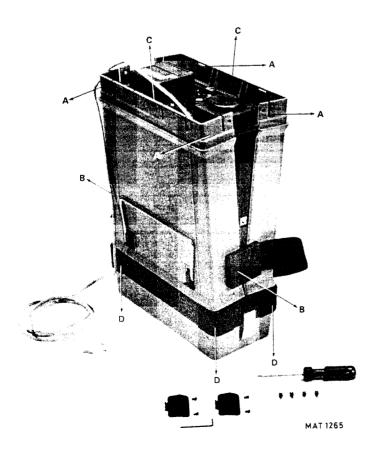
Removal of shoulder strap, top and bottom cover
